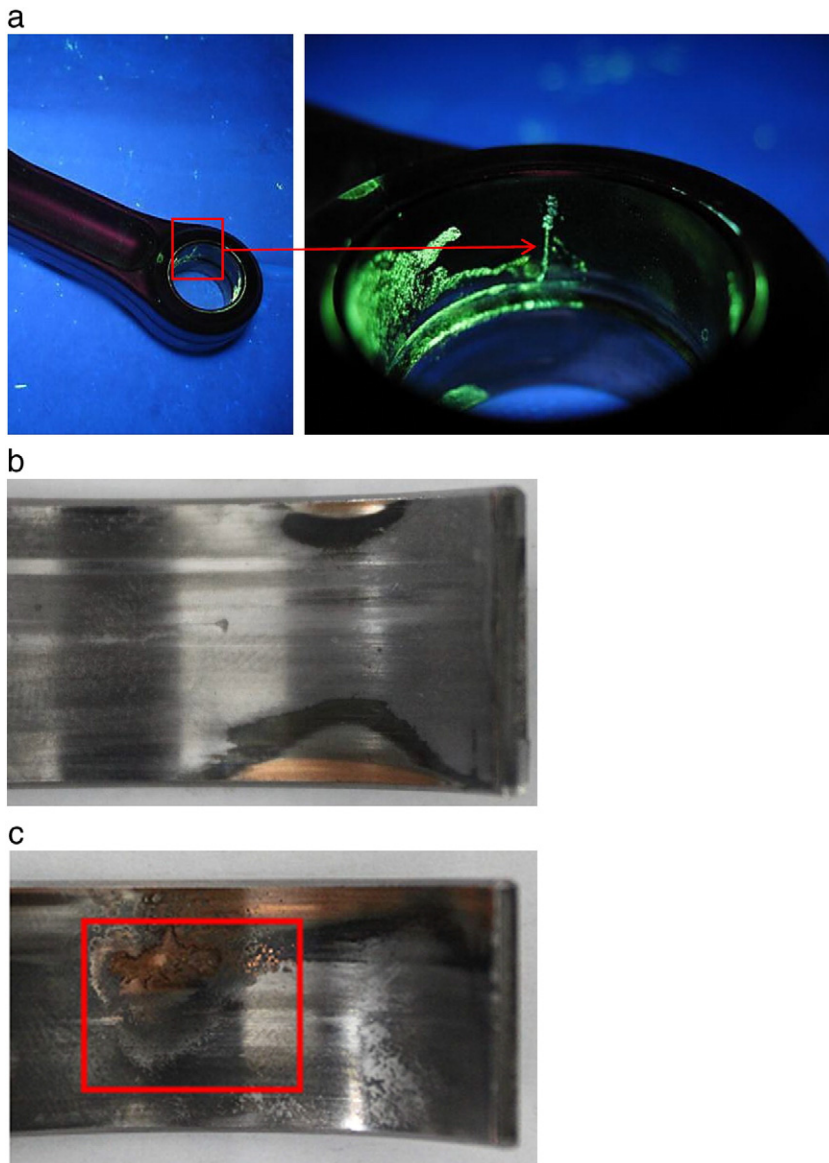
Tribological types of damage: (a) wear damage in the con-rod small end bush; (b) wear damage in the big end bearing; (c) cavitation damage in the big end bearing.
